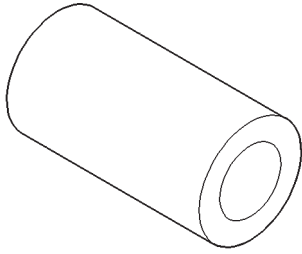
Silver Valve Guide Sleeve Tool C6818
